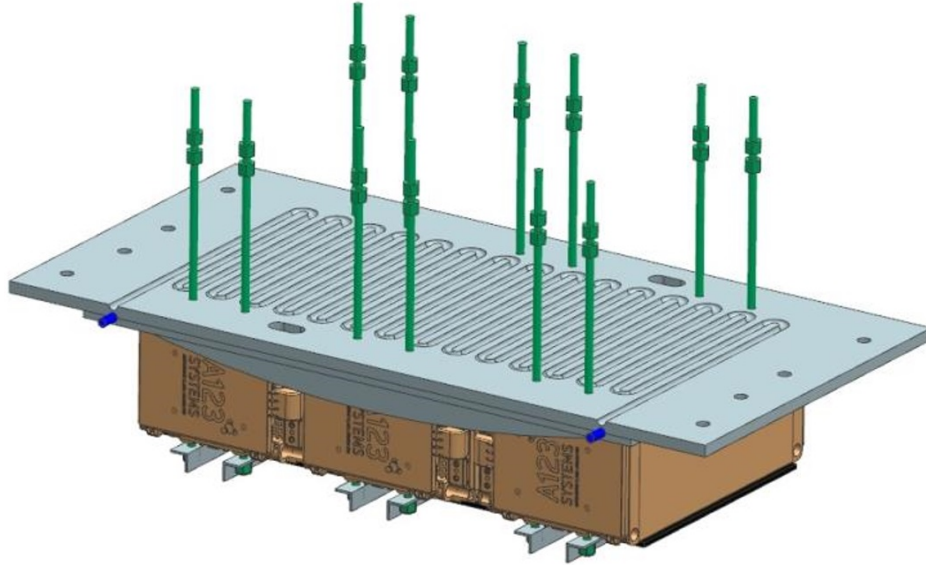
Battery Box partial view emphasizing coolant routing.
